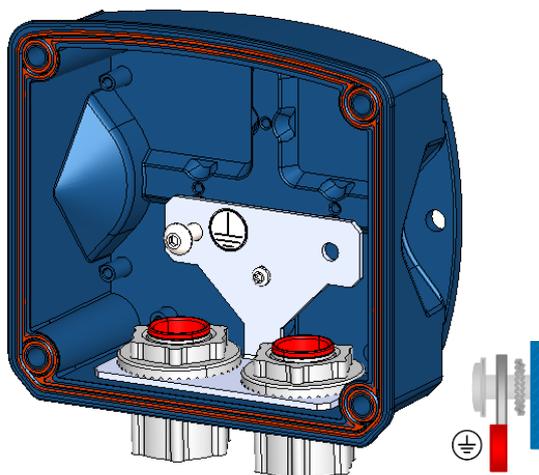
Protective Earth (PE) connection on conduit hub grounding plate
